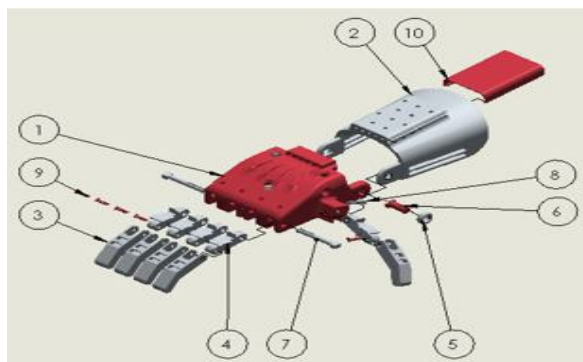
Prototype (Two-Segment Finger) Exploded View
